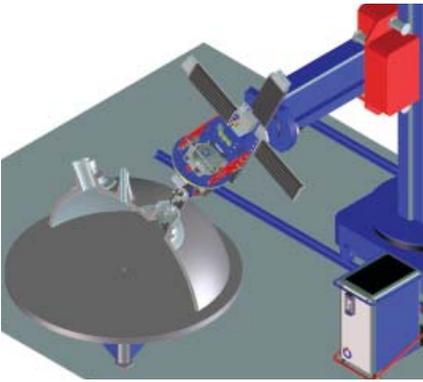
3D view of an installation with boom and collector head designed for cladding bores on fixed workpieces. The slide supporting the head provides the vertical movement. The assembly is mounted on a directional support to clad bores without necessarily having to adjust the parts to be clad.
